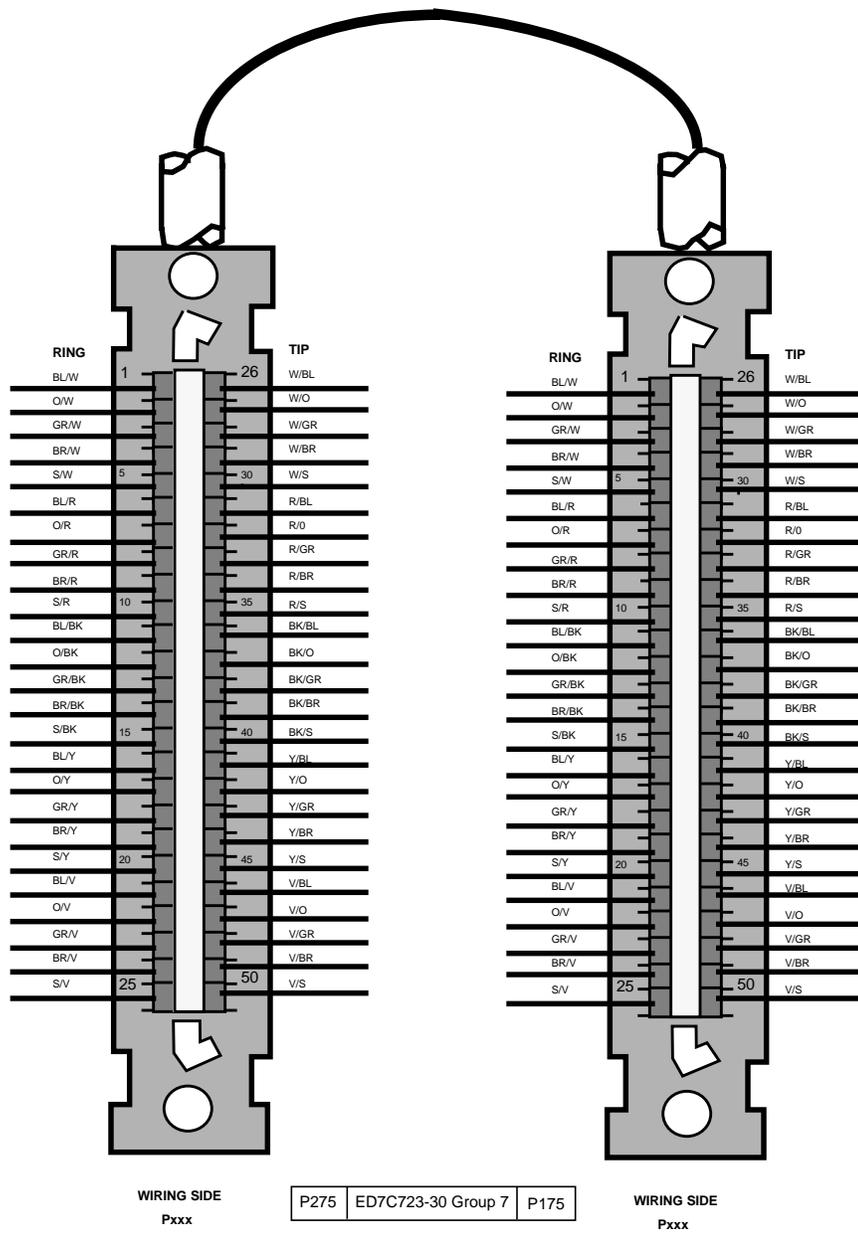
Cable Assembly ED7C723-30 Group 7
